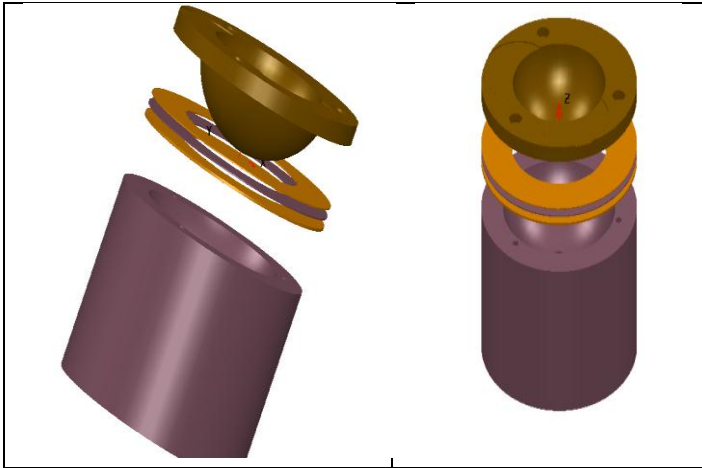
Three dimensional view of Piston with Crown and Gaskets
